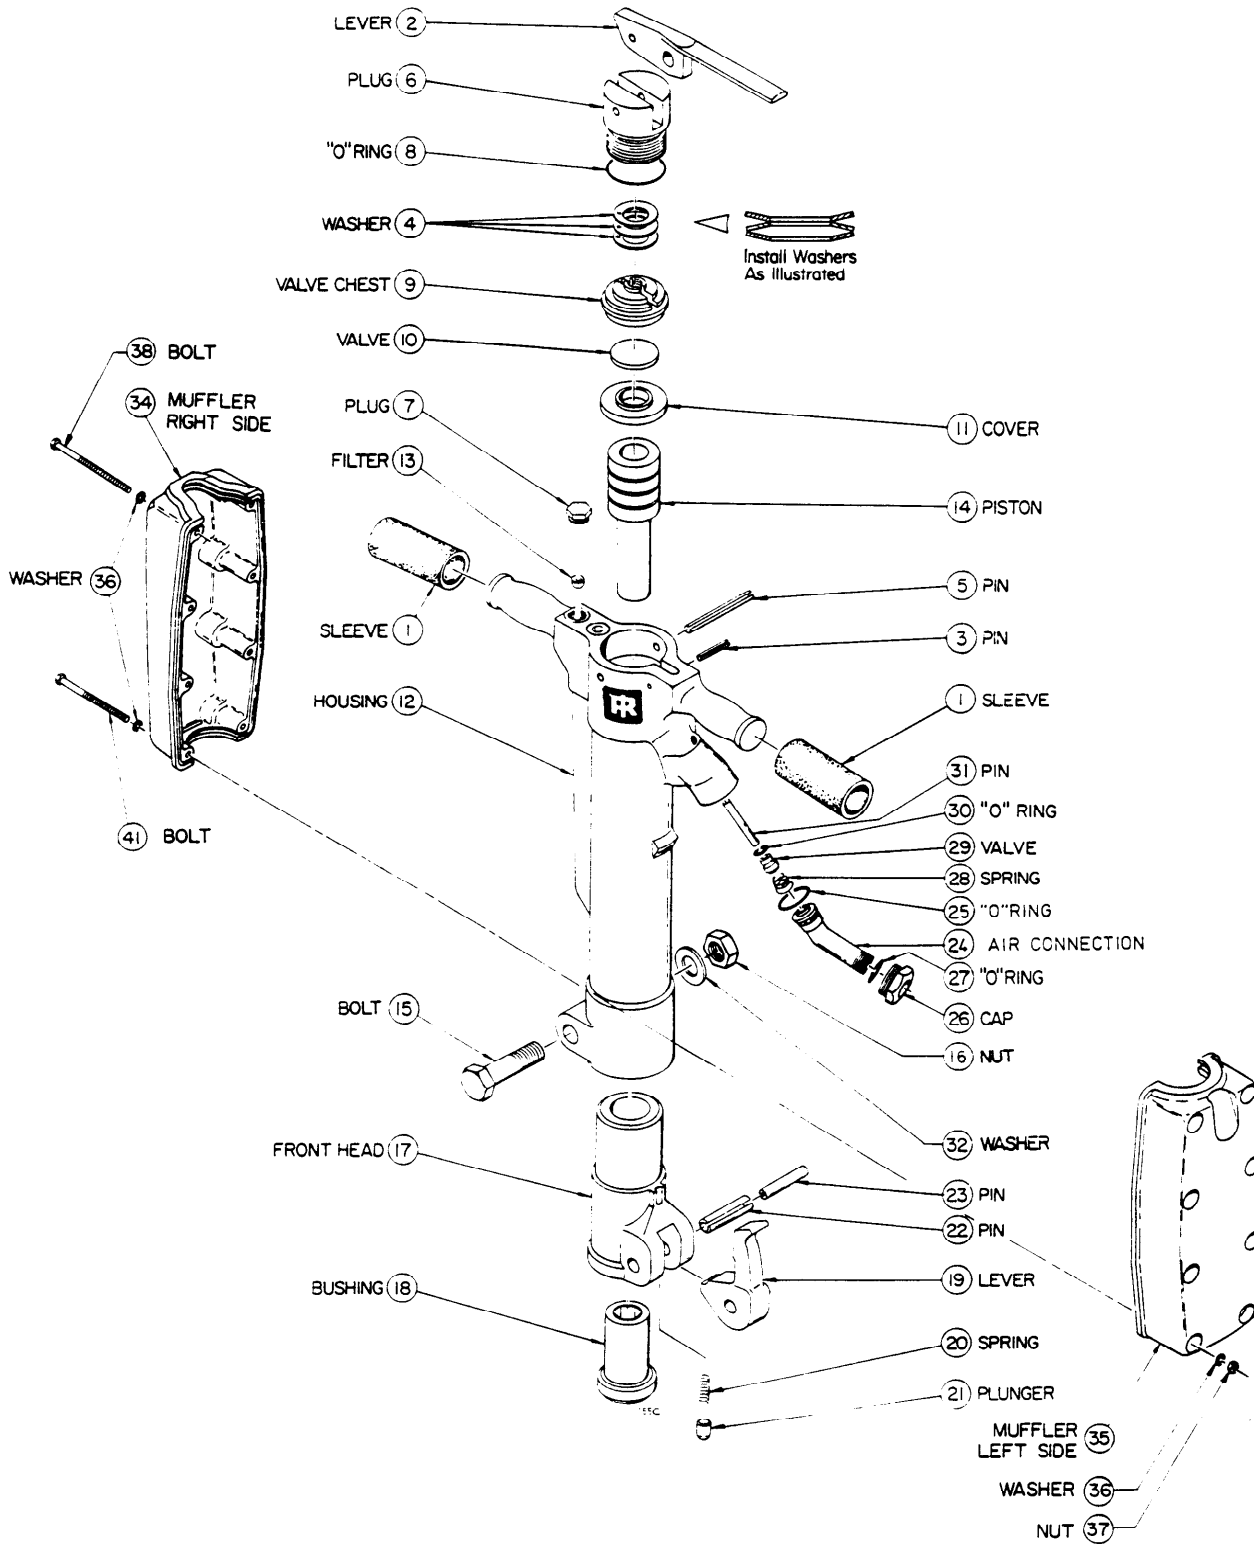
Paving Breaker Models PB85A & PB85AS – Exploded Illustration
